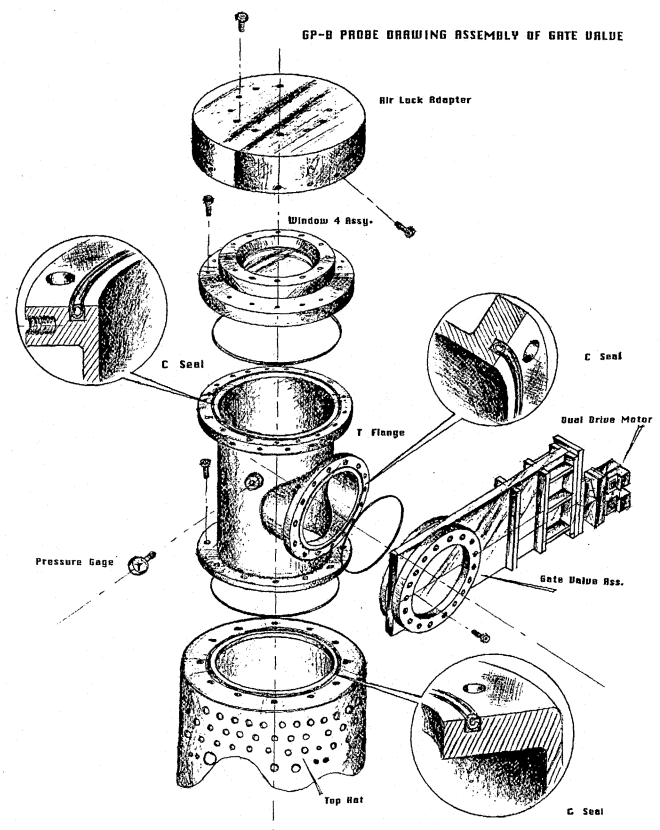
Exploded Sketch of Gravity Probe Assembly
